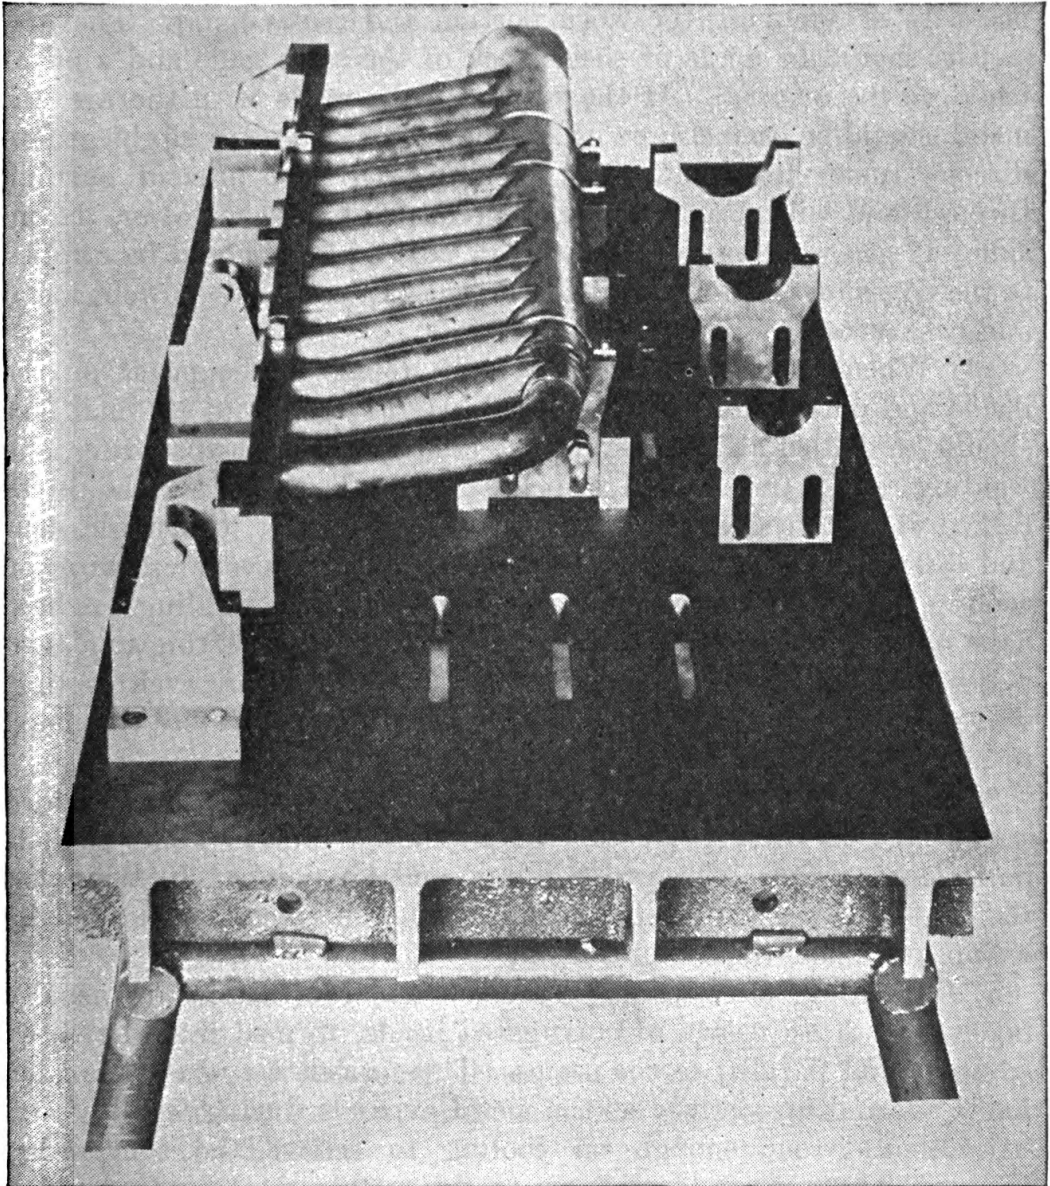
Welding jig used in construction of engine exhaust manifold.
